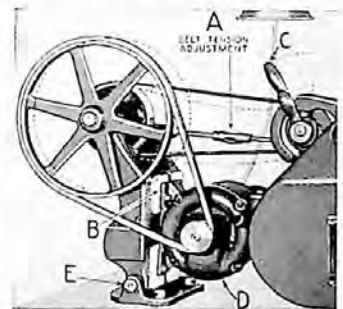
Fig. B. Horizontal Motor Drive Countershaft, Adjustable Type
